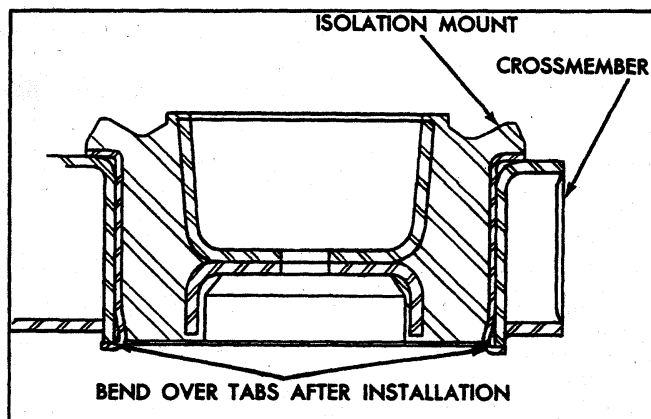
Crossmember Mount Cross-Section (Corvette)
